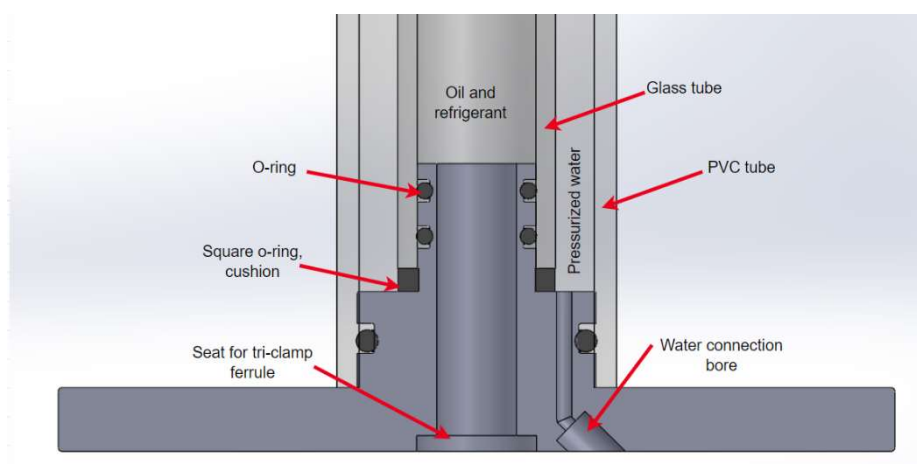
Cutout of the internal design of the sight glass flange and assembly.
